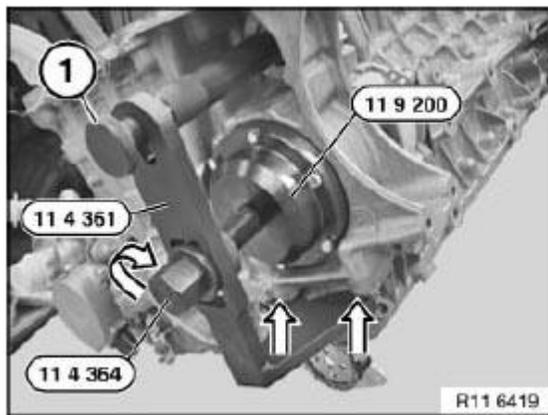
Connecting Special Tool 11 4 364 Into Special Tool 11 9 200 And Screwing Out
